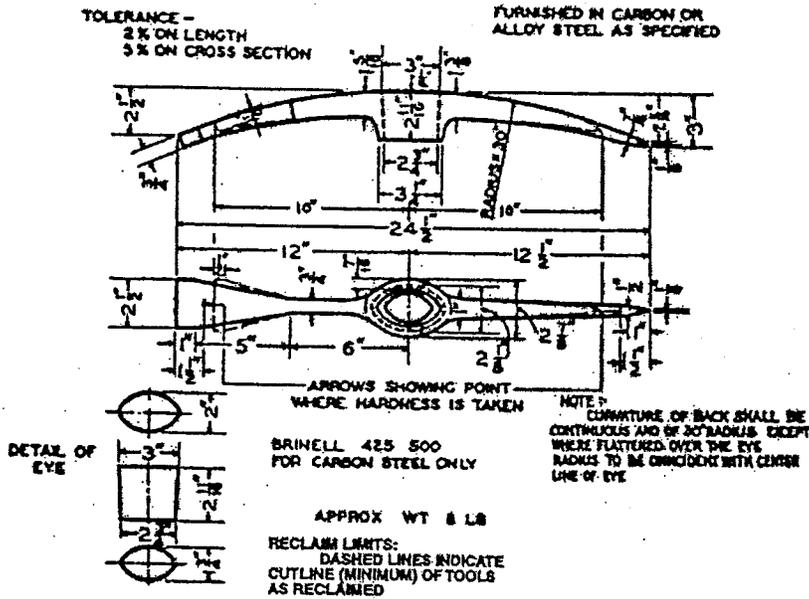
Plan 2-62 - AREMA Tamping Pick
